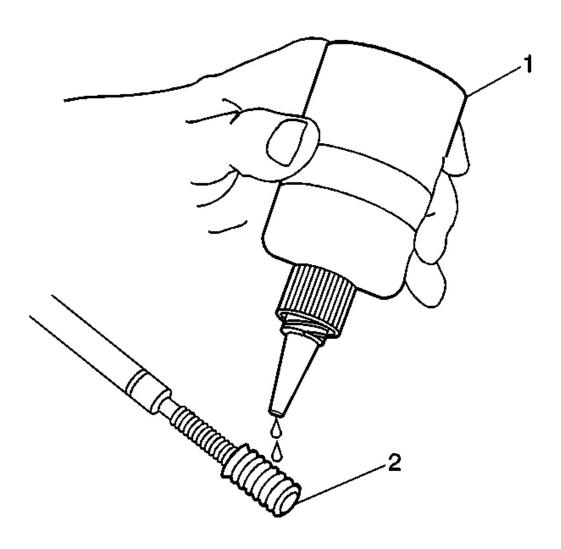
Applying Threadlock To Insert Courtesy of GENERAL MOTORS CORP.
